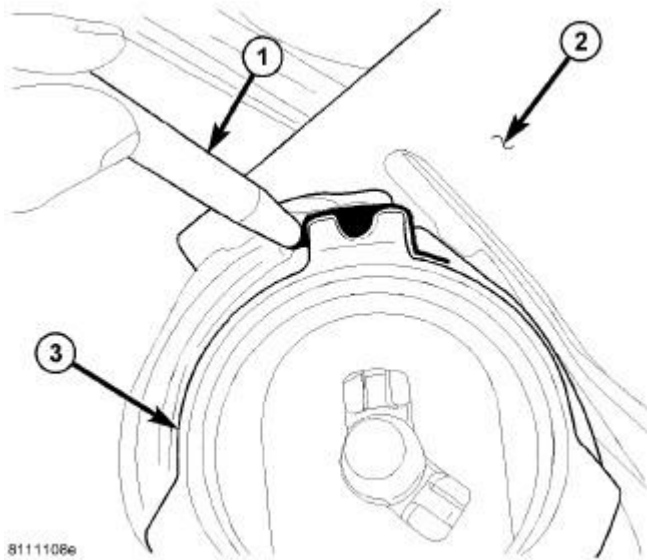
MARKING LOCATION OF FRONT BUSHING
